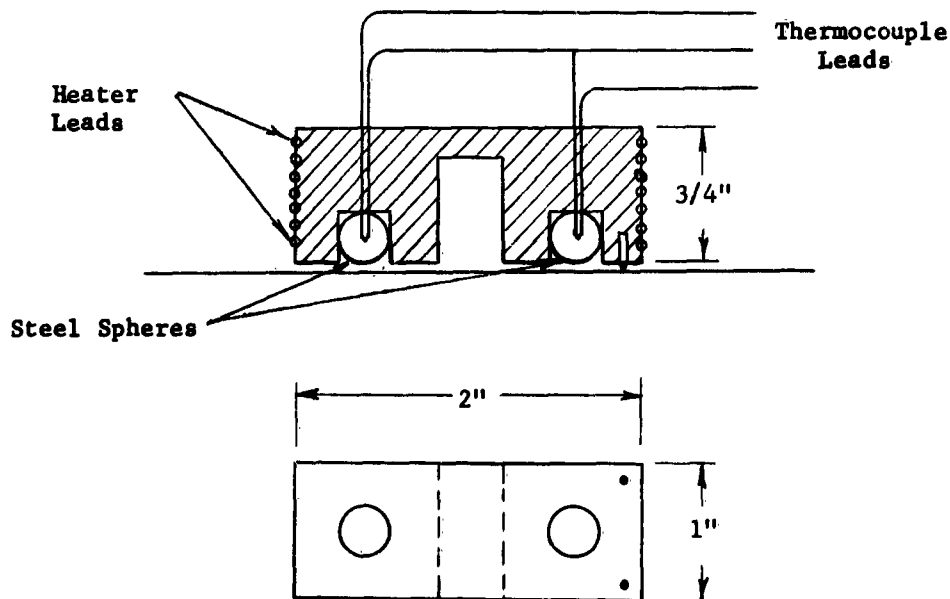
Schematic of Mounted Metal Spheres Showing Imbedded Thermocouples.
